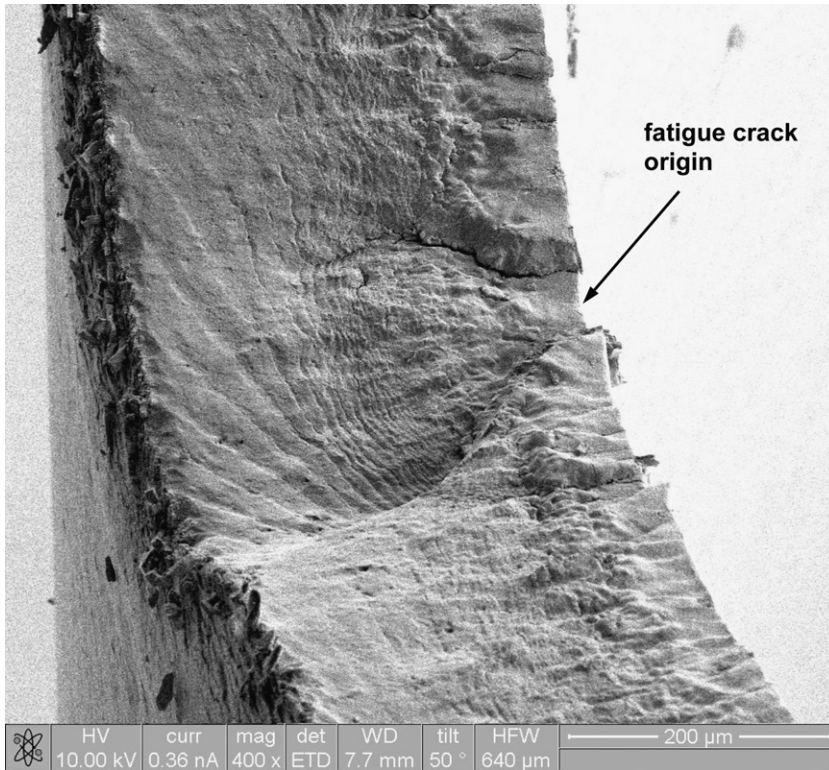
Scanning electron microscopy image showing fatigue crack origin on fracture surface obtained in one of the thermo-mechanical fatigue tests considered.
